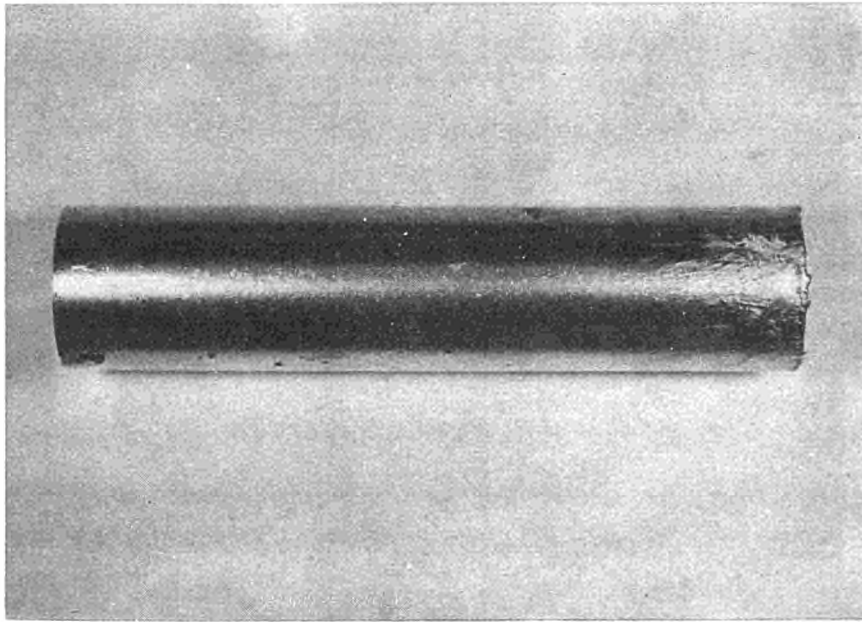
Zircaloy 2 tube coated by hot dipping
